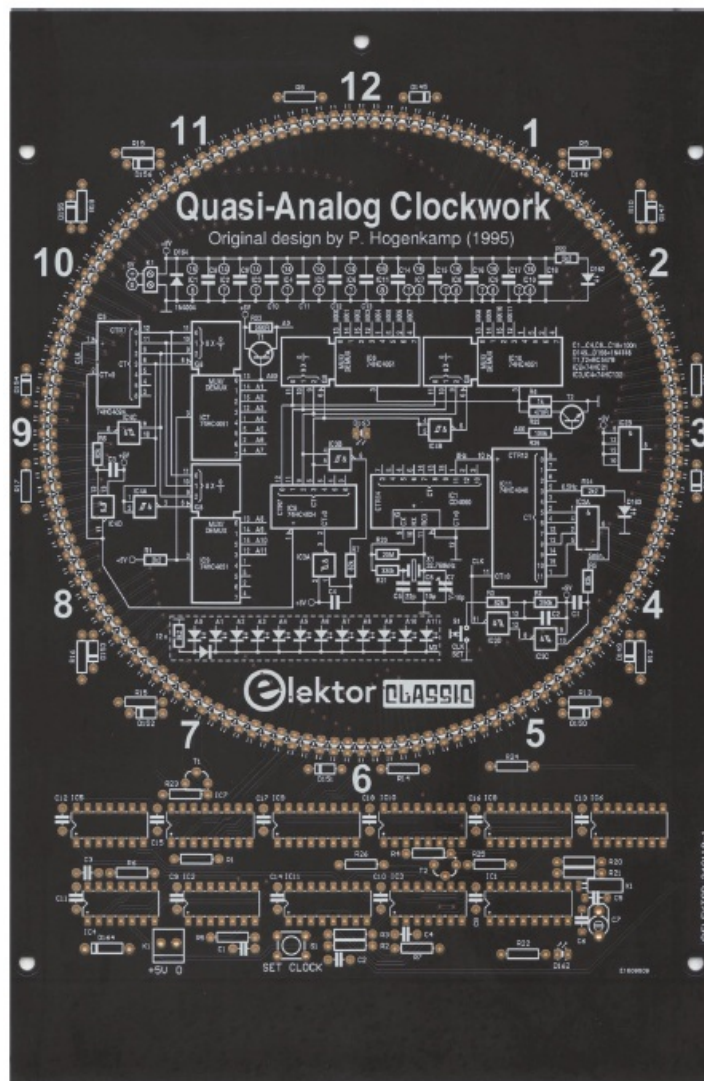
Top view of supplied PCB 240118-1 v1.1.
